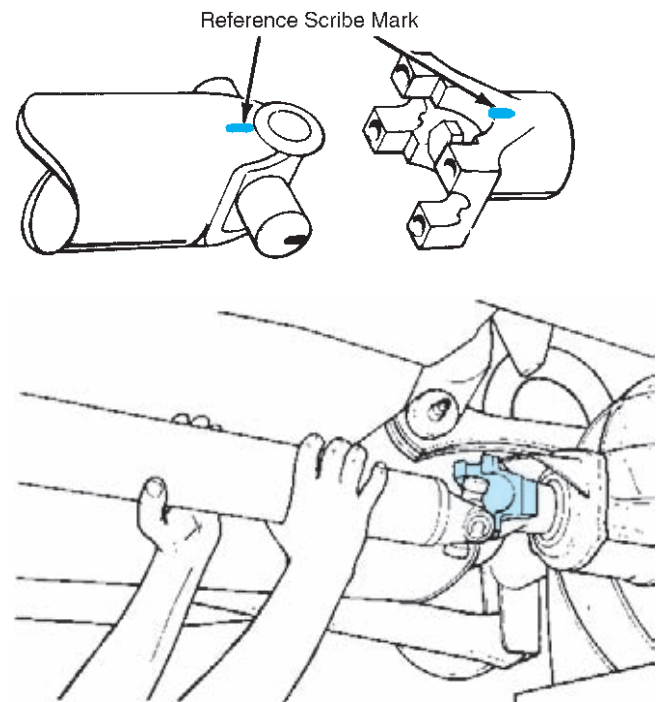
Before removal, make index marks at the rear U-joint so that the shaft can be replaced in its original position. (Courtesy of Ford Motor Company)
